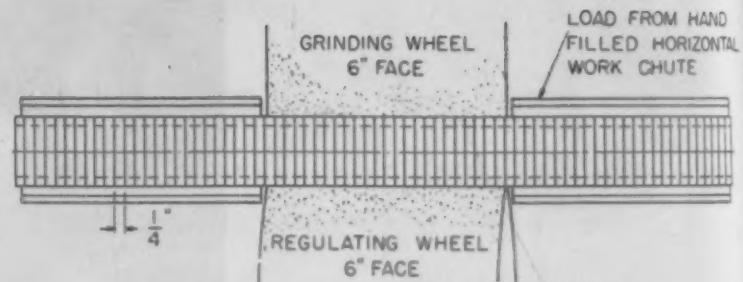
High production through-feed centerless grinding job (cast iron piston rings). (Courtesy: Landis Tool Co.)
